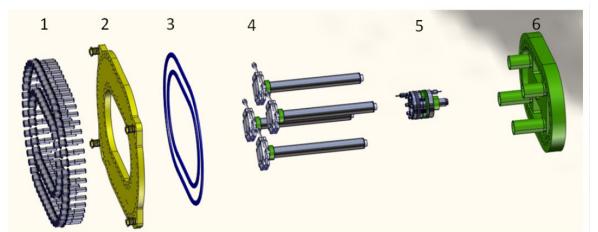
Exploded view of vacuum flange assembly, [1] fasteners, [2] connection flange, [3] Helicoflex seals, [4] Johnston couplings, [5] electrical feedthrough, [6] cryopump vacuum flange.
